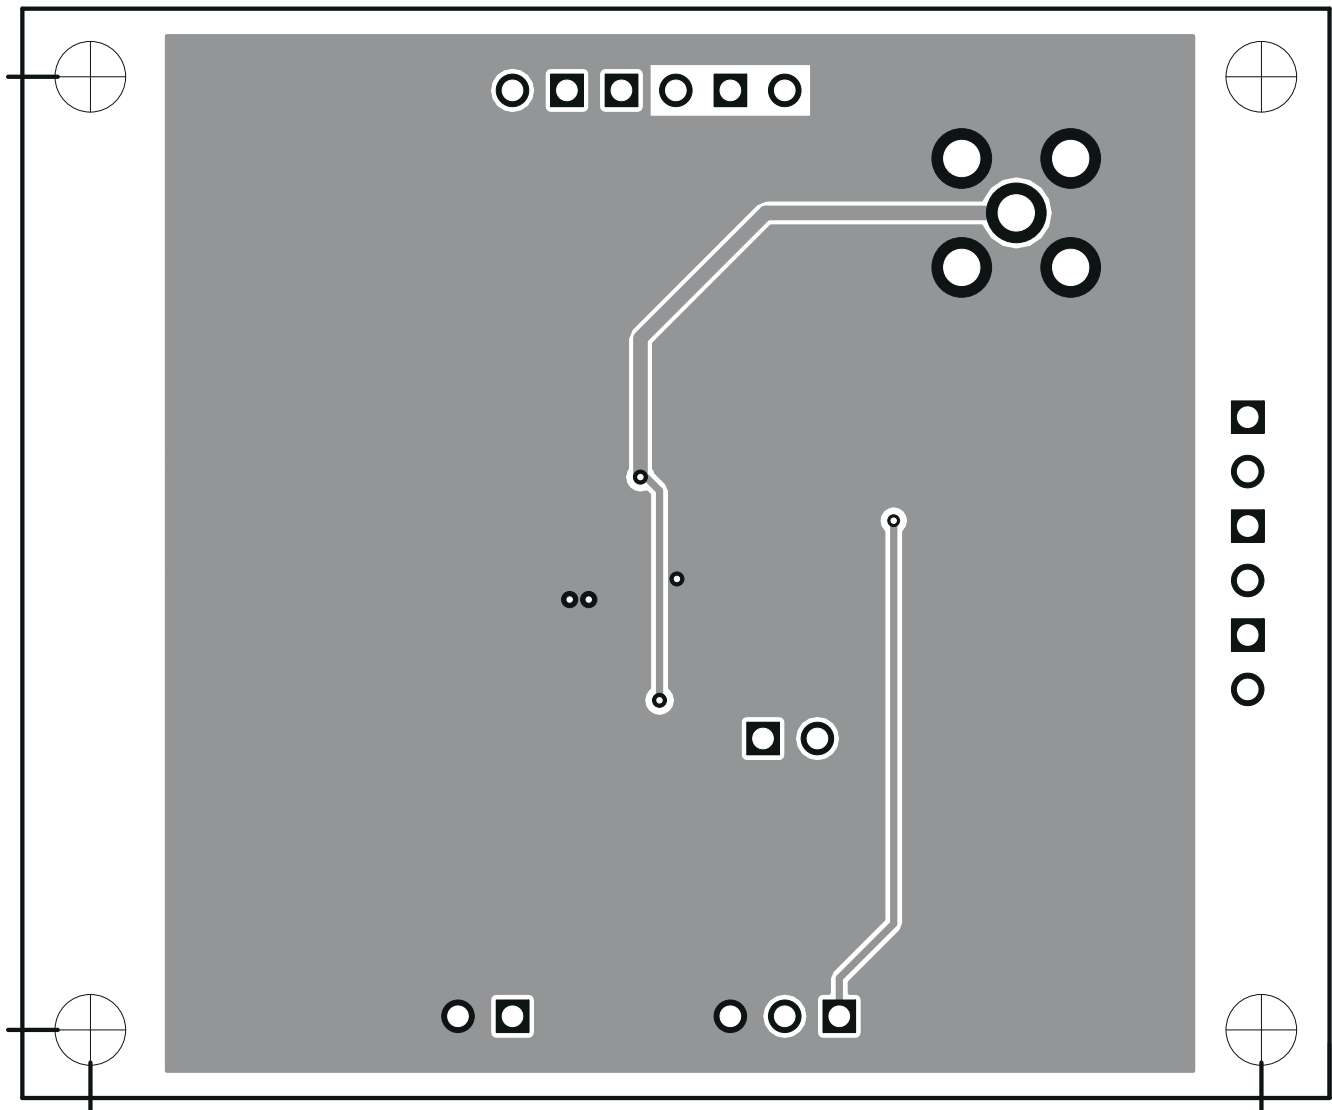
TPS62120EVM Bottom-Side Copper (Bottom View)
